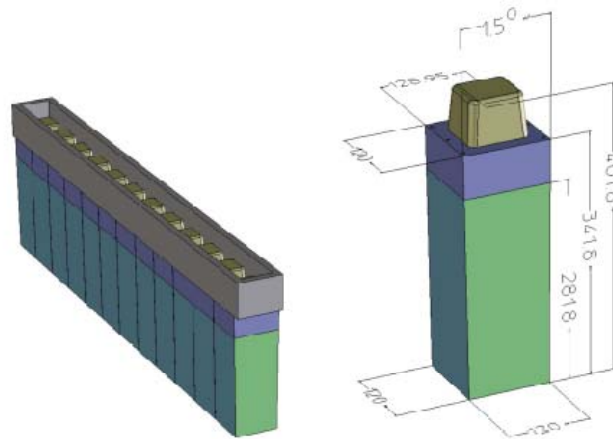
A single 1.5° taper module (right hand side) with the dimensions of the prototype shown in mm. The left hand figure shows a single strip module comprised of 12 EMCal modules integrated onto a single strong back.
